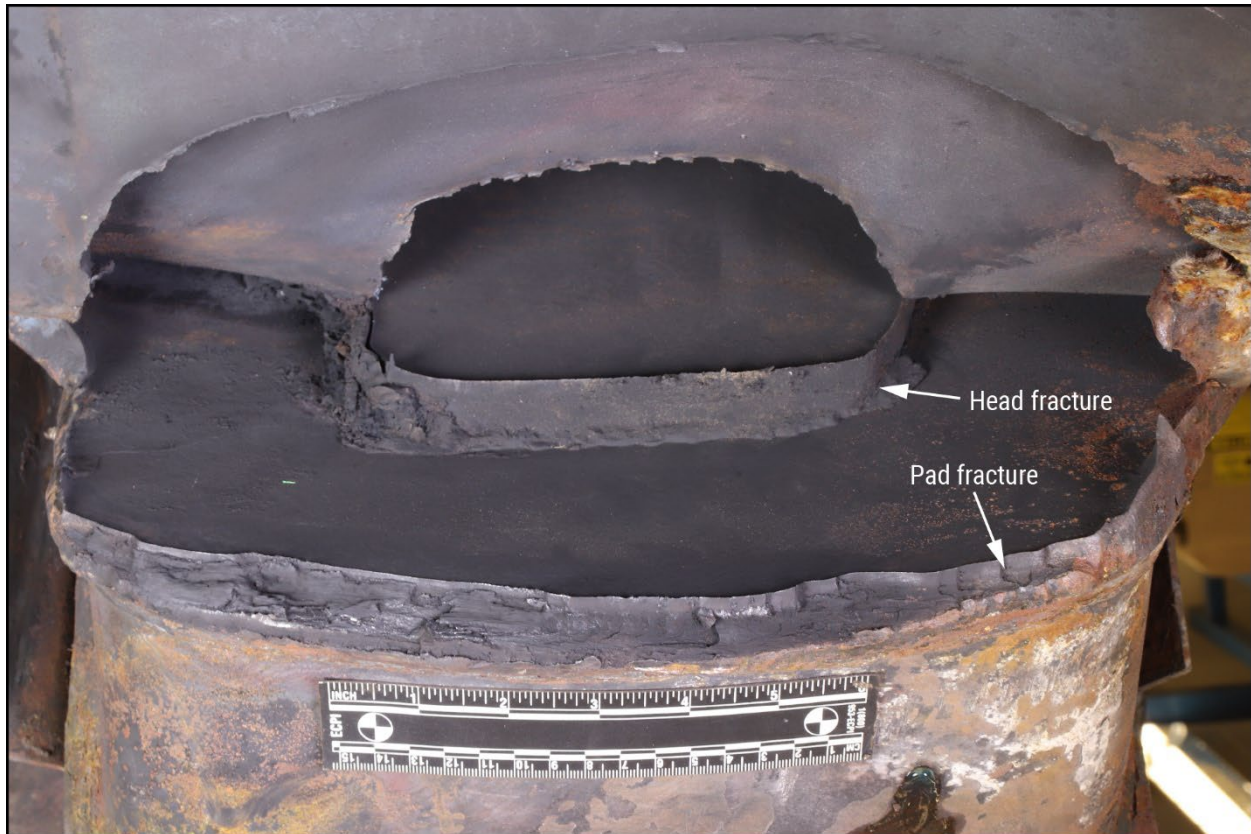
Close-up view of sectioned piece from tank car TILX731751.
